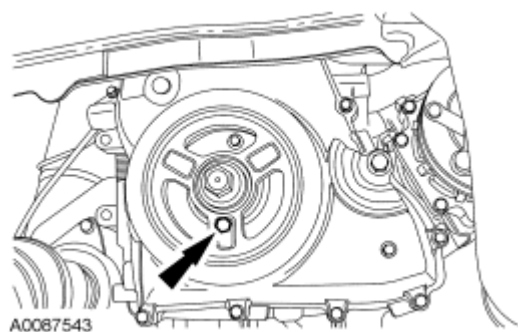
Aligning Crankshaft Pulley Bolt Holes
